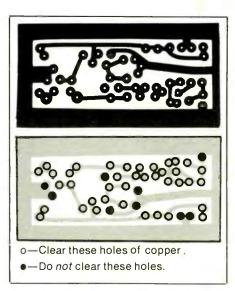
Actual-size etching-and-drilling guide (upper) and drilling/holeclearing details (lower) for doublesided printed-circuit board.
